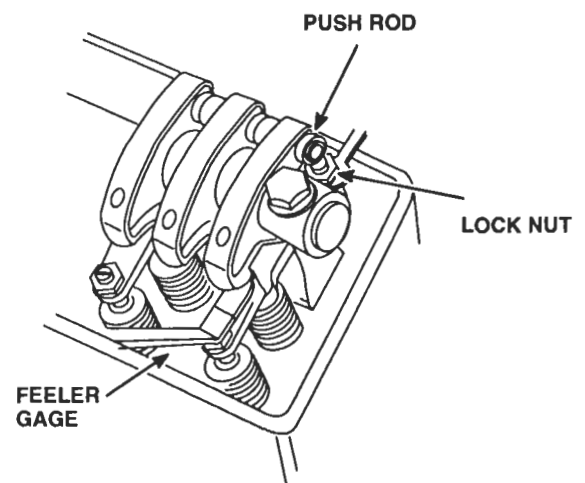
Adjusting Valve Clearance (Unloaded Valve Bridge)
